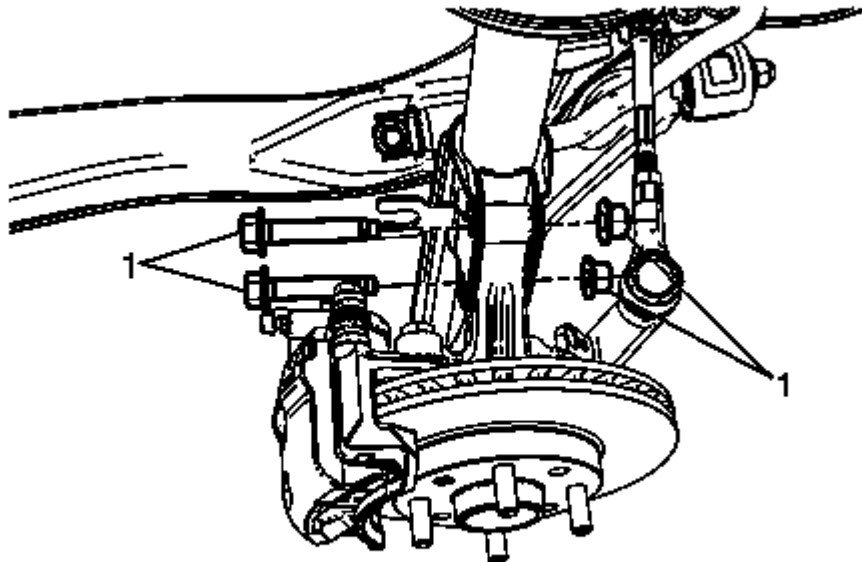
Steering Knuckle To Strut Bolts And Nuts
